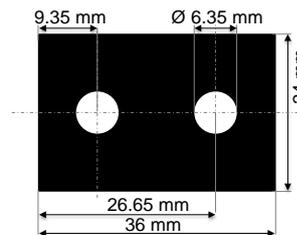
Design of CFRP specimen for test setups 1 and 2.
